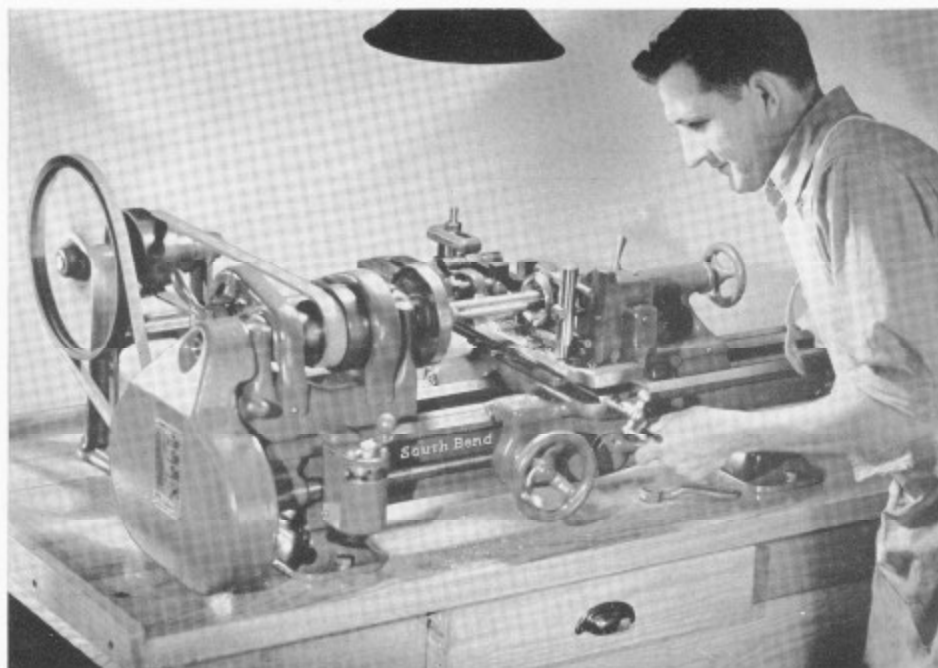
Boring a re-babbitted connecting rod on a 9-inch "Workshop" South Bend Lathe.
